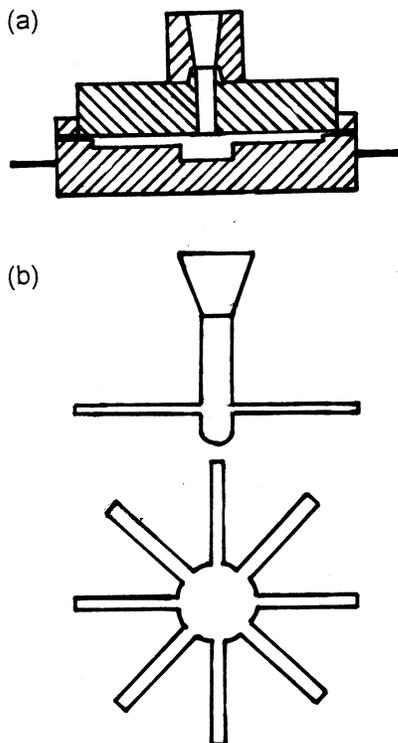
Fluidity sample and its metal mould: (a) metal mould; and (b) fluidity sample.
